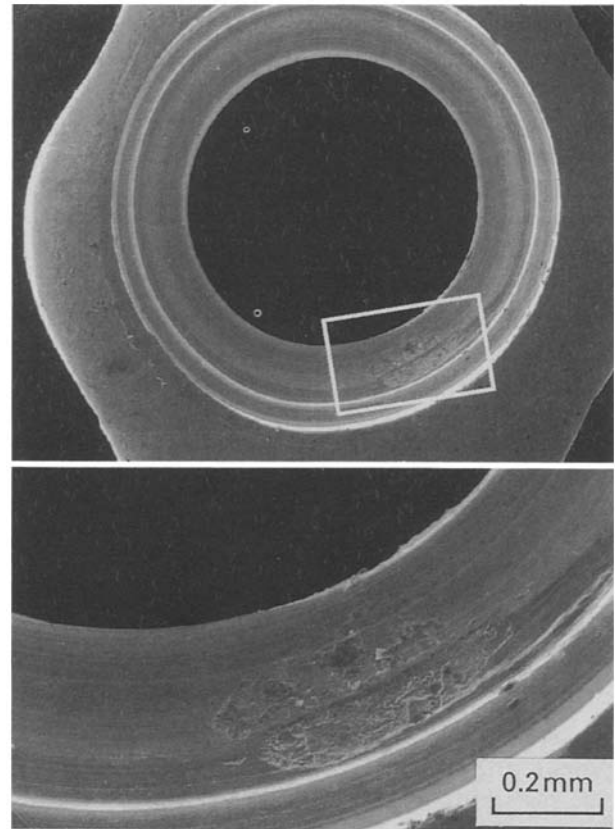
Typical appearance of a corrosion defect in a plate hole countersink of a stainless steel plate.
